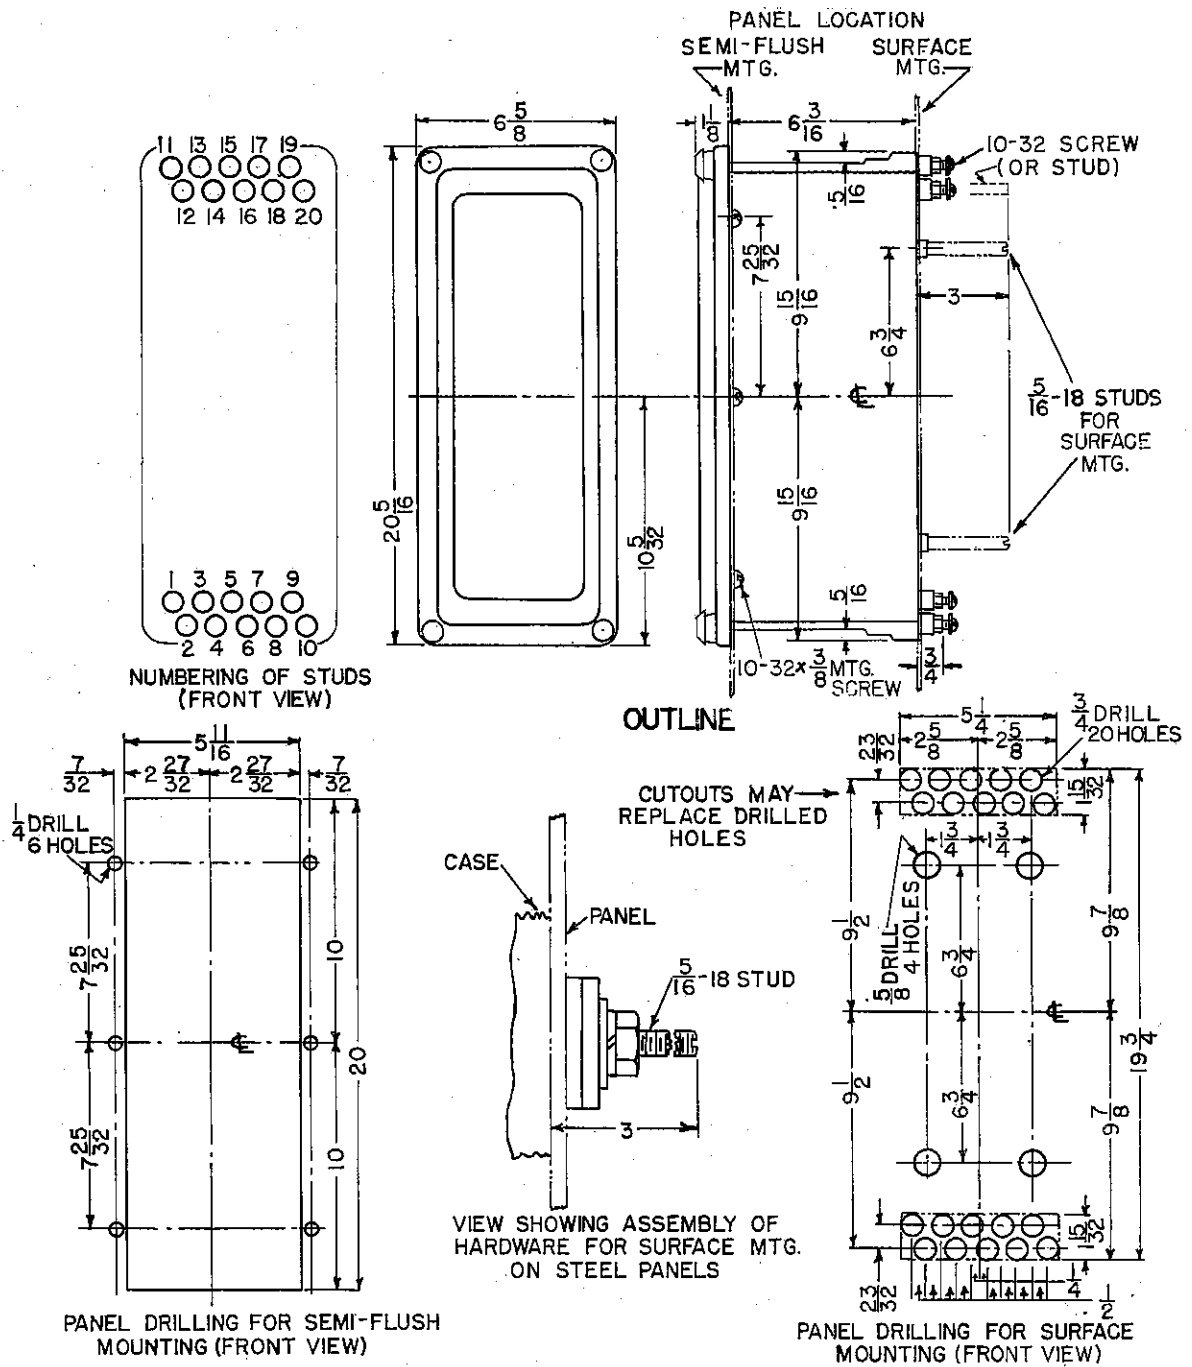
Outline & Panel Drilling Dimensions For Type EDD Relay (Network Unit)
